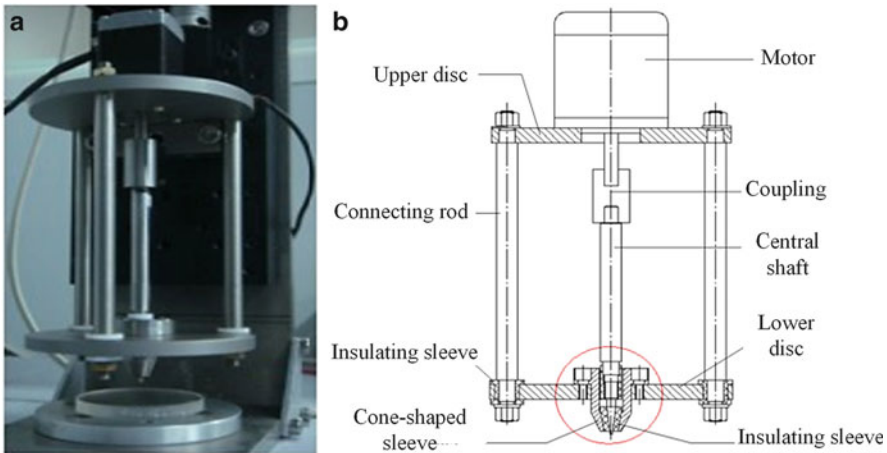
ER polishing equipment. (a) Polishing device; (b) tool head
